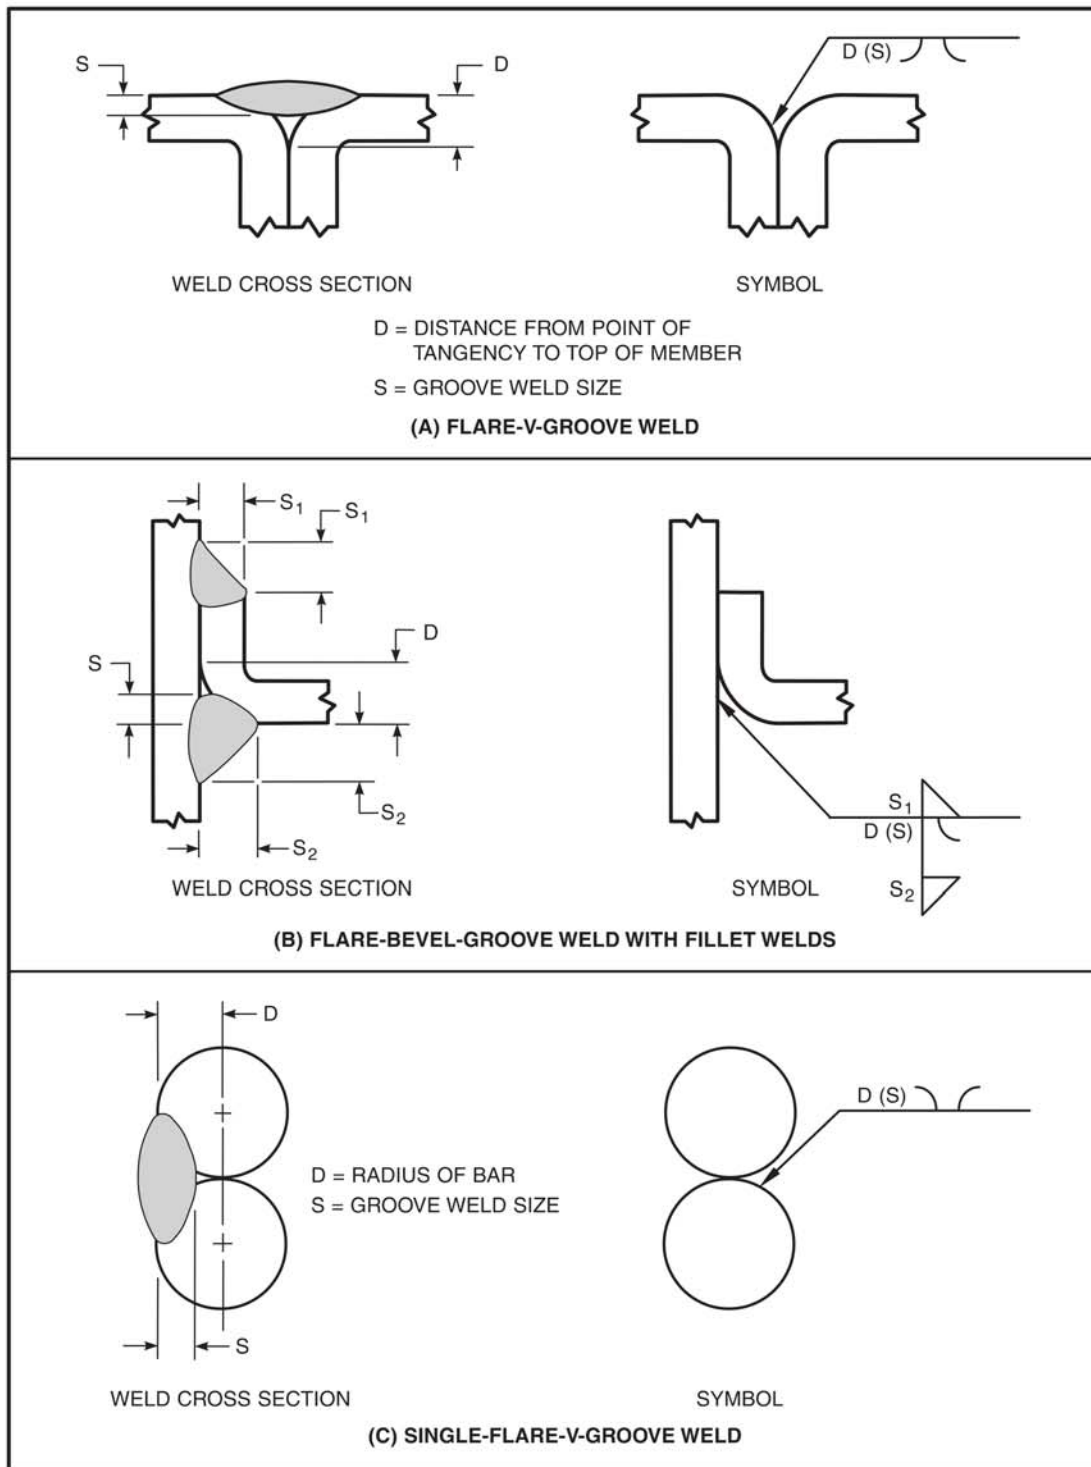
Application of Flare-Bevel and Flare-V-Groove Weld Symbols
